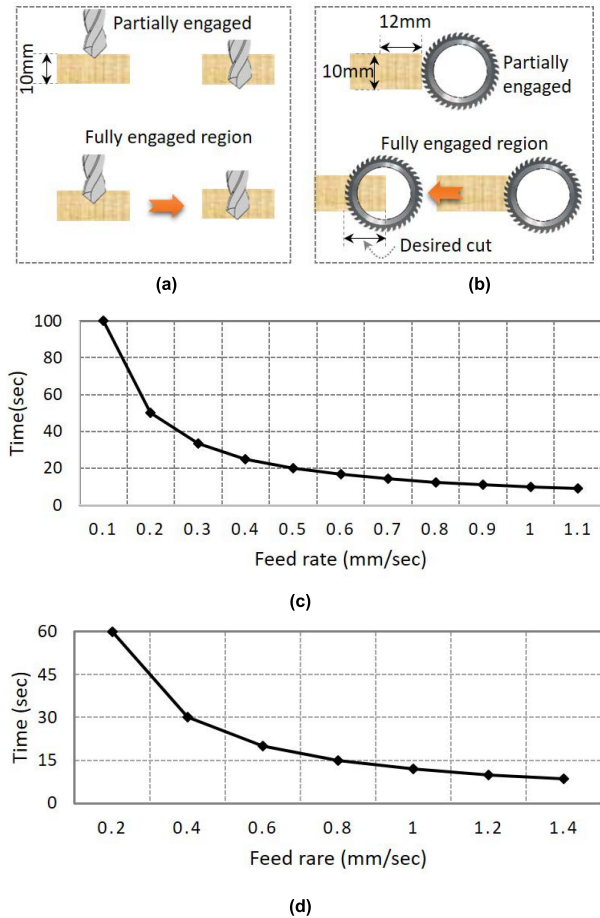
Task objective and tool engagement during drilling and milling tasks (a) Drilling task (objective: to drill through a plate of 10mm thick of ABS material) (b) Milling task (objective: to cut a plate of 10mm width and 12mm thick of ABS material. (c) Time required to complete drilling task at different feed rate (d) Time required to complete milling task at different feed rates.
